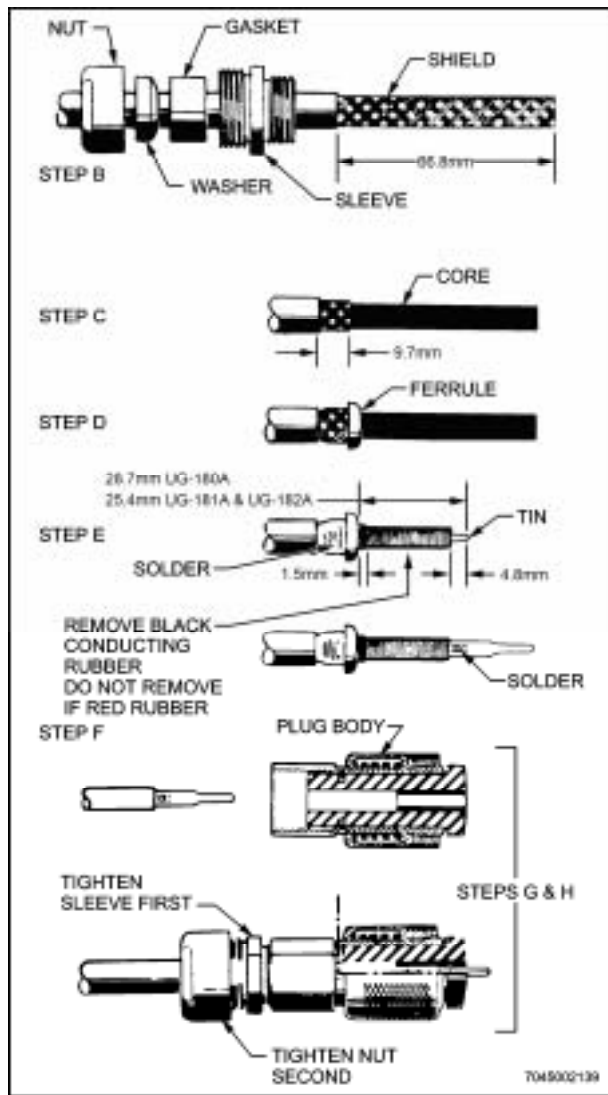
Assembly of Rubber Insert Pulse Connector
